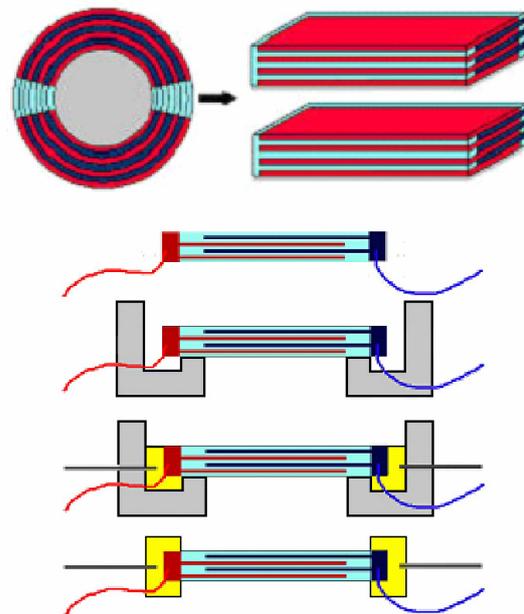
Fabrication and packaging process for a multilayer expanding actuator
